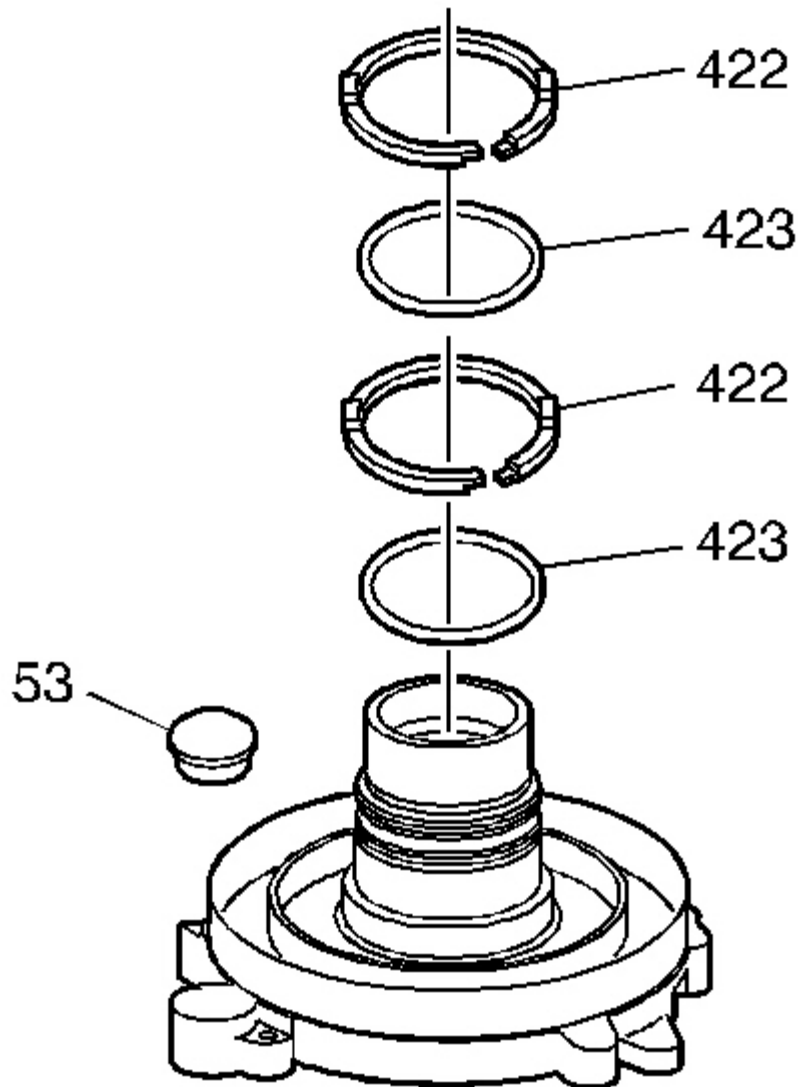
Identifying Oil Ring & Scavenge Tube Seal Inspection Areas
